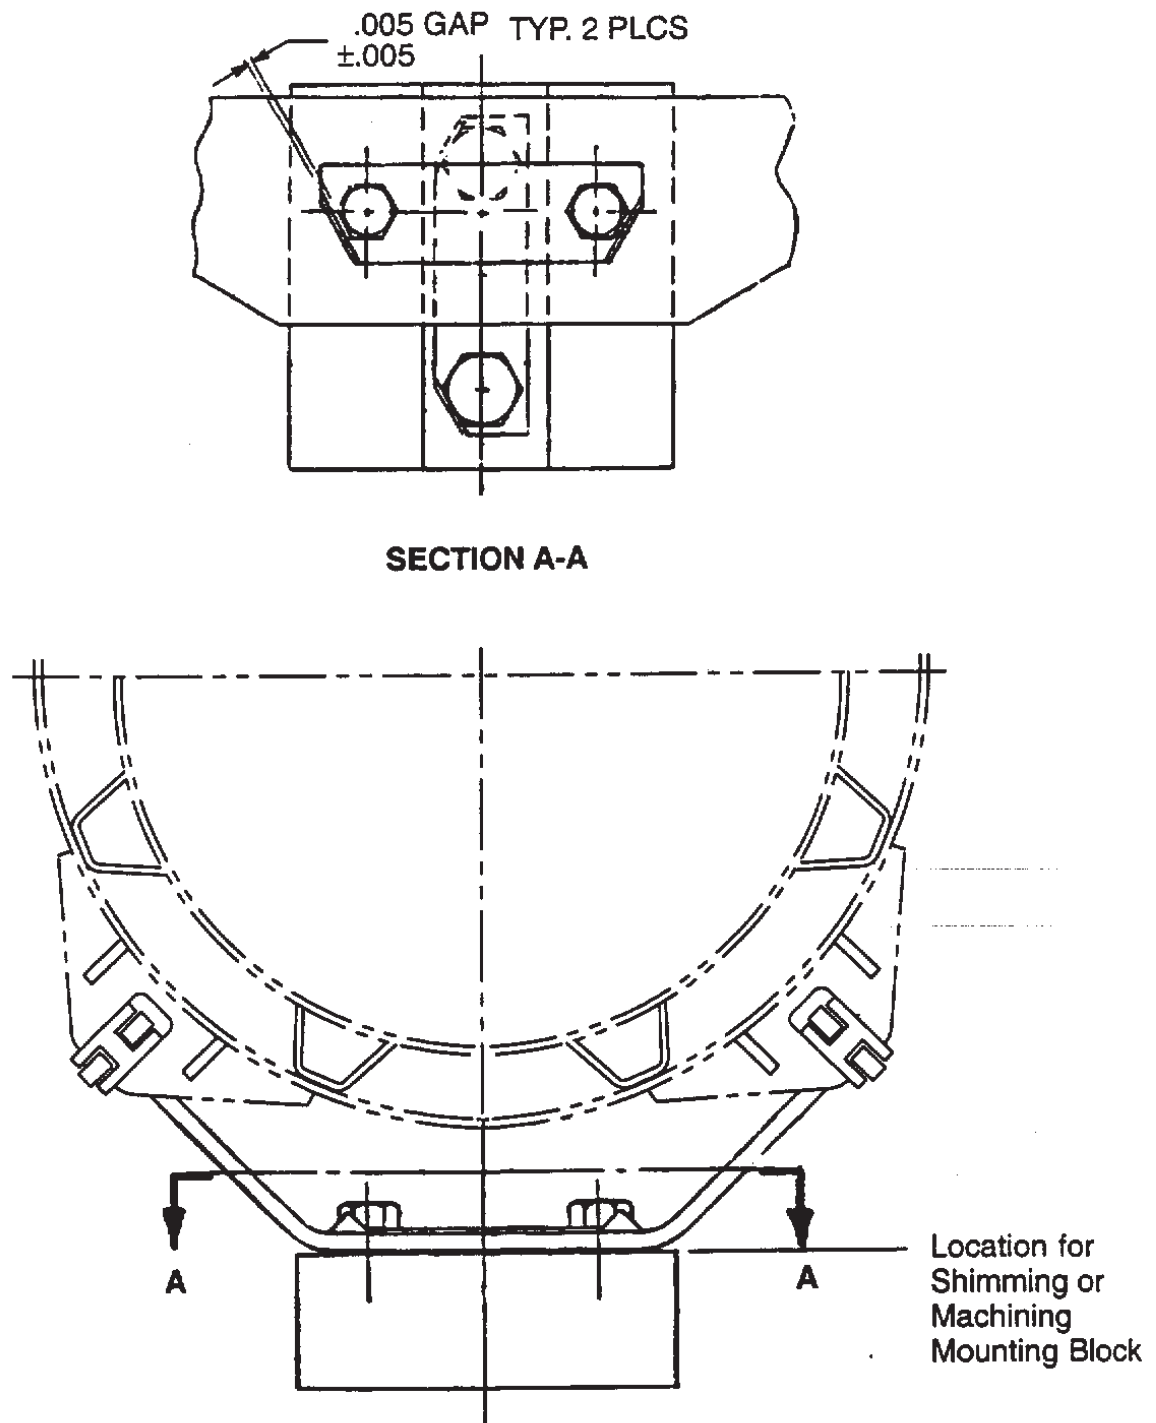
Forward (Bullhorn) Support Clamp Bolt Lockplating
